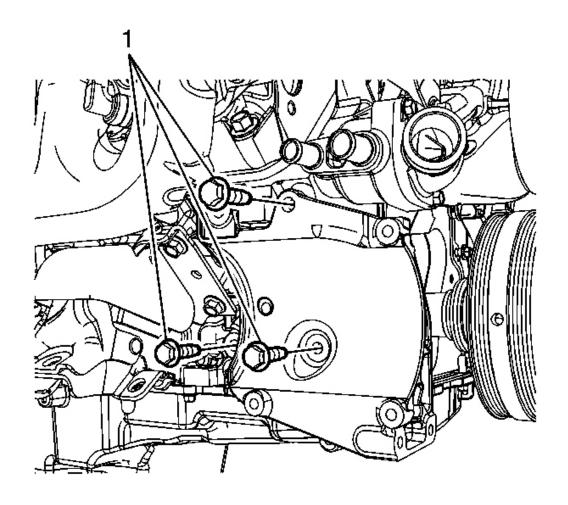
Engine Mount Replacement - Right Side Courtesy of GENERAL MOTORS CORP.
